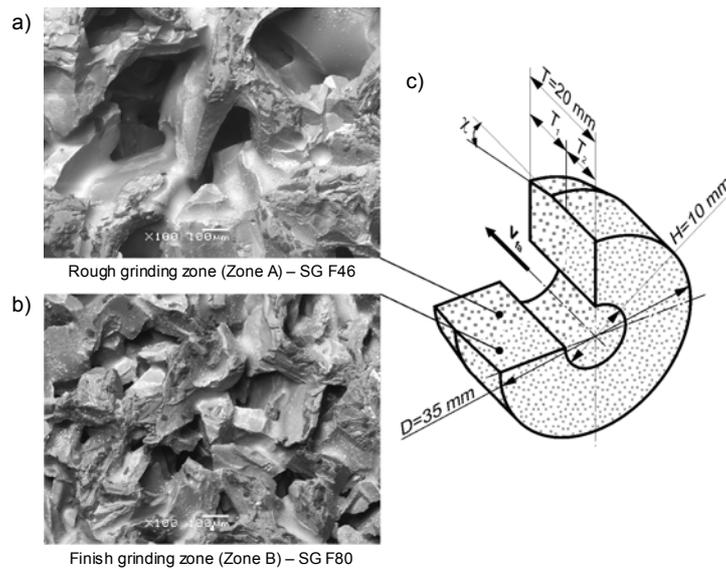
The example of structure of grinding wheel for single-pass internal cylindrical grinding: a) overall scheme, b) photomicrography of rough grinding zone (Zone A), c) photomicrography of finish grinding zone (Zone B) [7]
